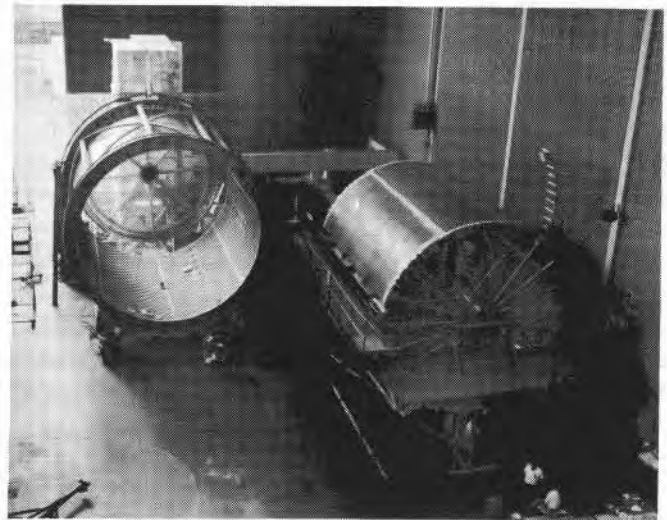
Panjuris welding of cylindrical section of tank (LH₂)
